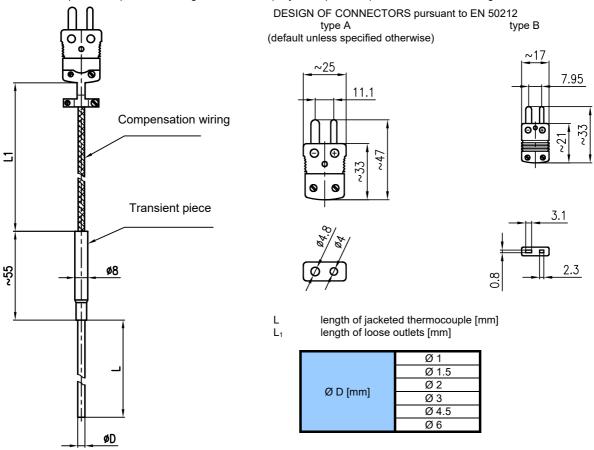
DIMENSIONAL DRAWING - DESIGN E
